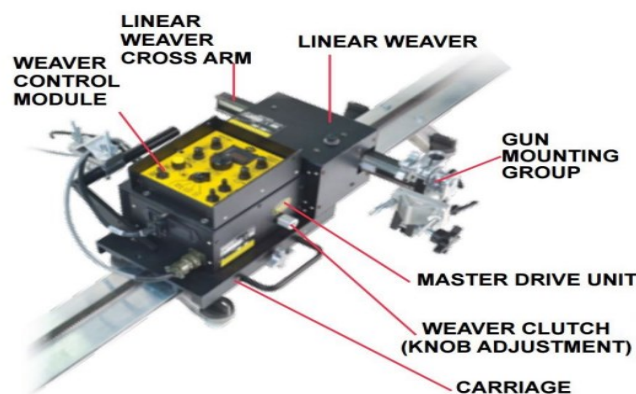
Layout of the BUG-O System linear welding robot MDS-1005 (Steffens et al., 2015).
